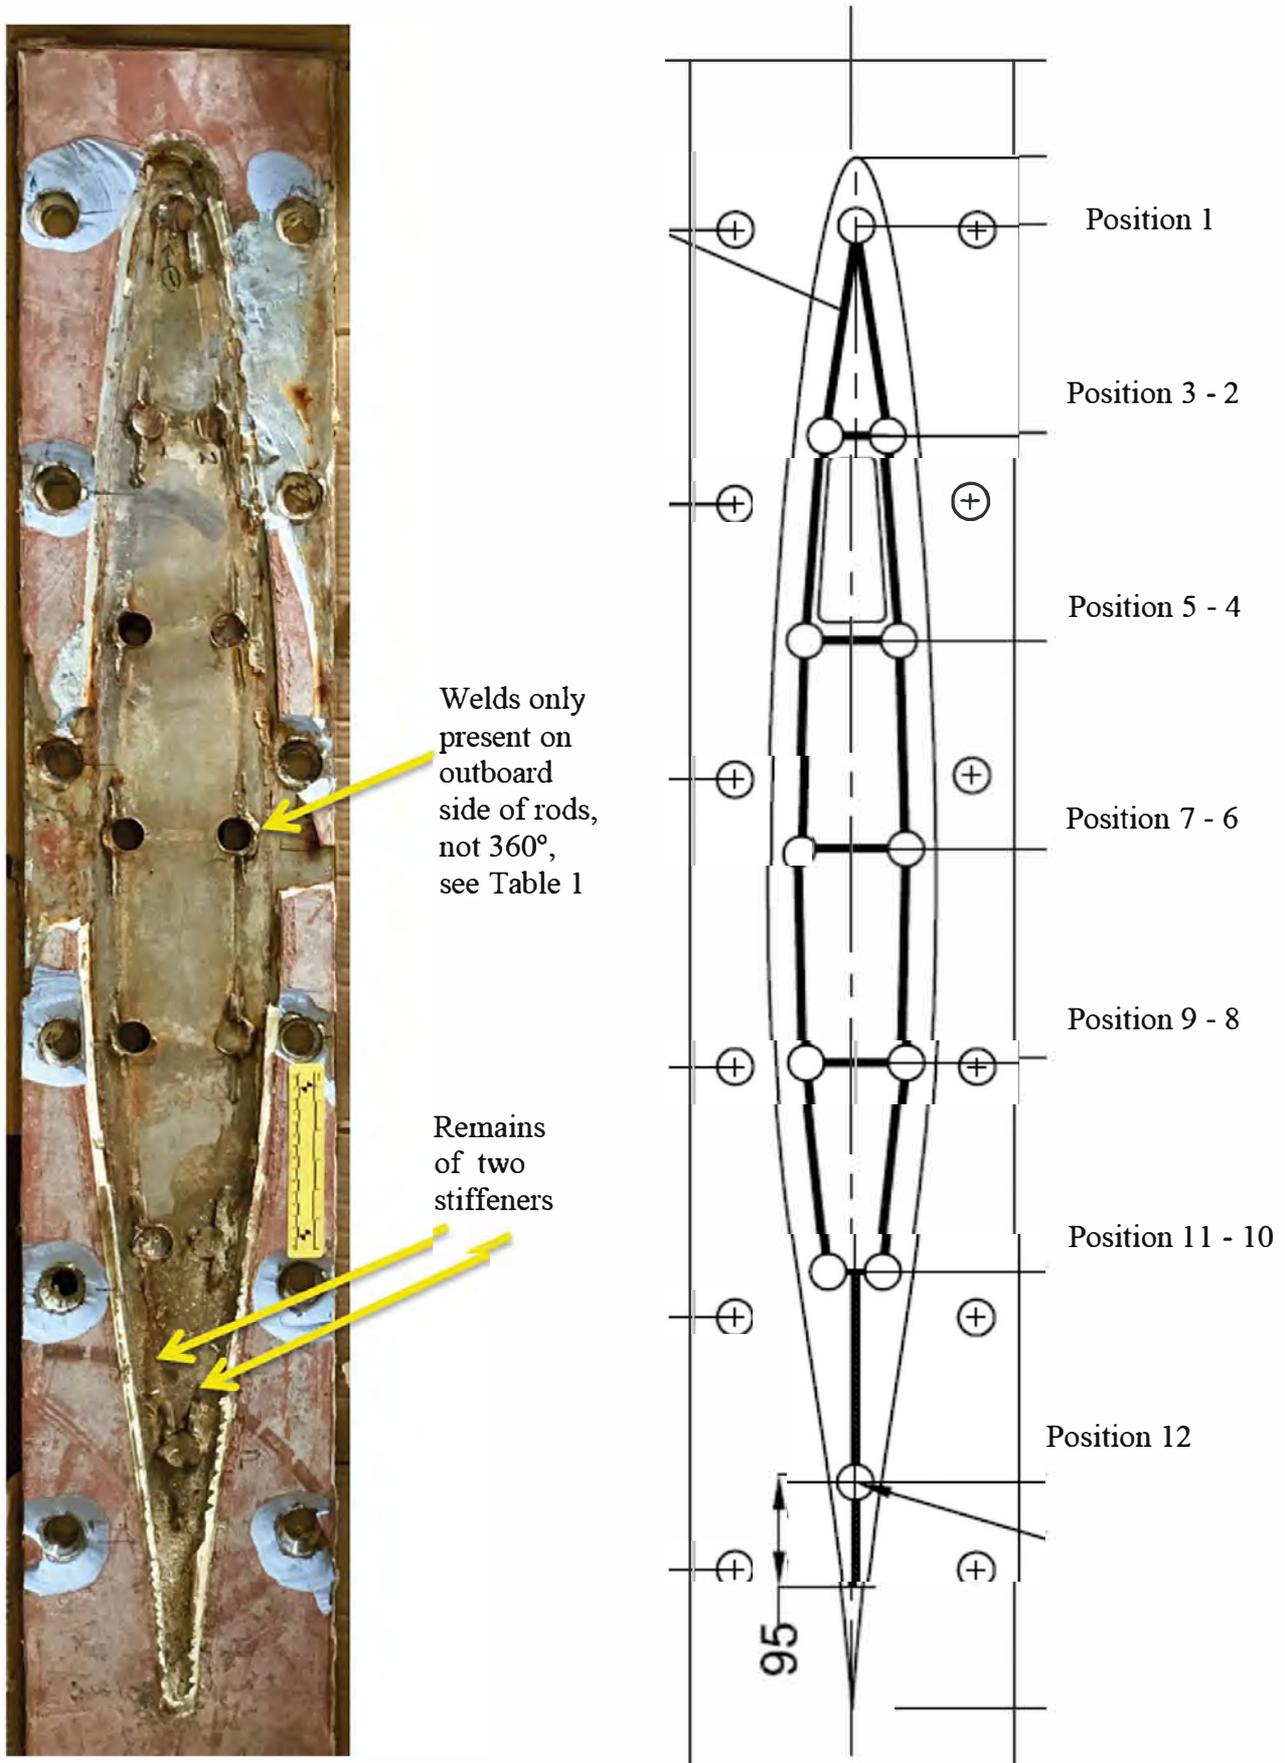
Image and drawing of plate. Note the different stiffener arrangement.
